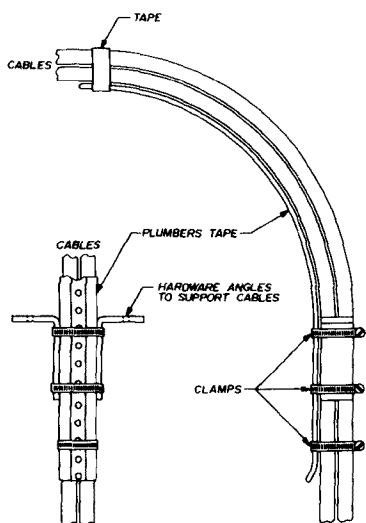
Support assembly for securing coax cable and rotator power lines to the tower. Plumber's tape limits minimum-radius bend for the transmission line, which is important to avoid breakage or short circuits. Clamps are ordinary stainless-steel hose clamps assembled with plastic electrical tape between clamp and cable bundle.
